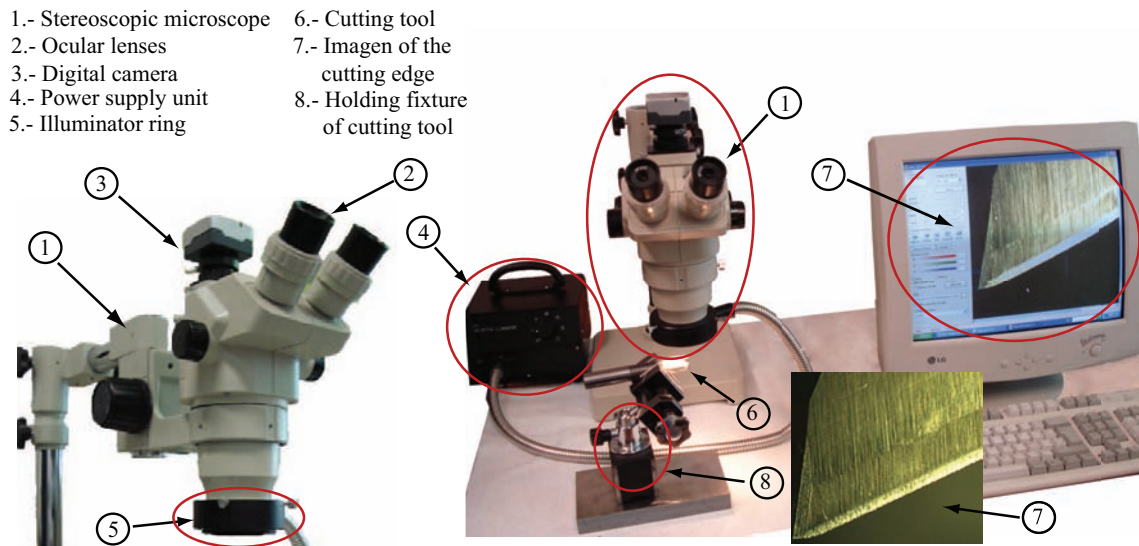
Equipment for measuring the flank wear of the cutting edge.
